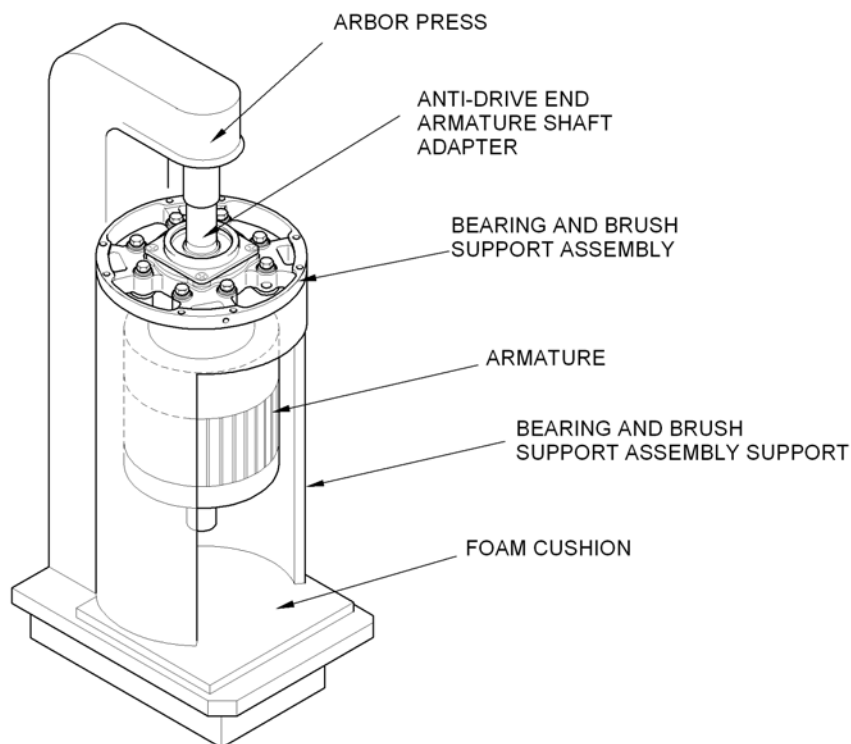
Removing Armature from Bearing and Brush Support Assembly
